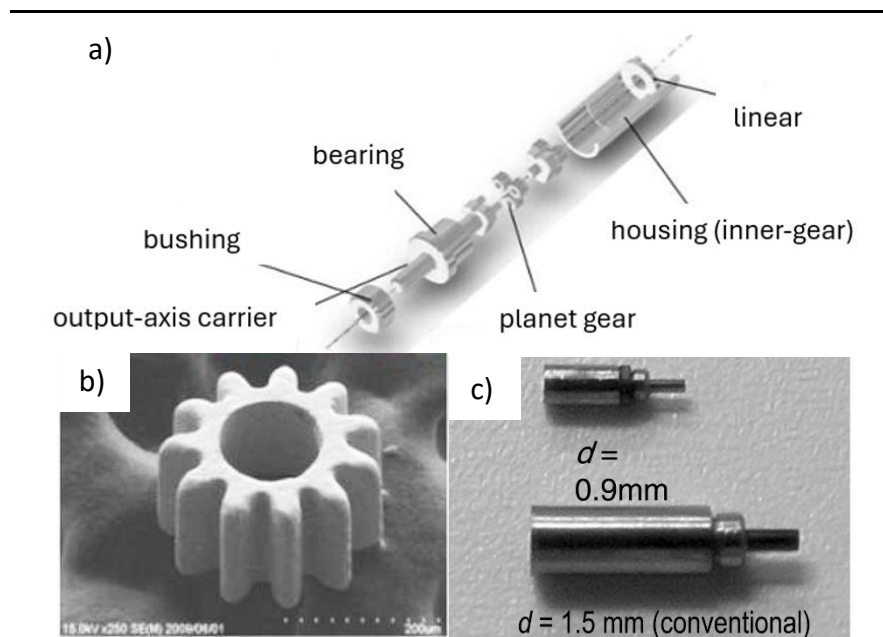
Smallest geared-motor made of Zr-based MG a) schematic view of gear, b) MG gear c) assembled geared-motor- the smallest $d = 0.9$ mm, and the conventional $d = 1.5$ mm [86]
